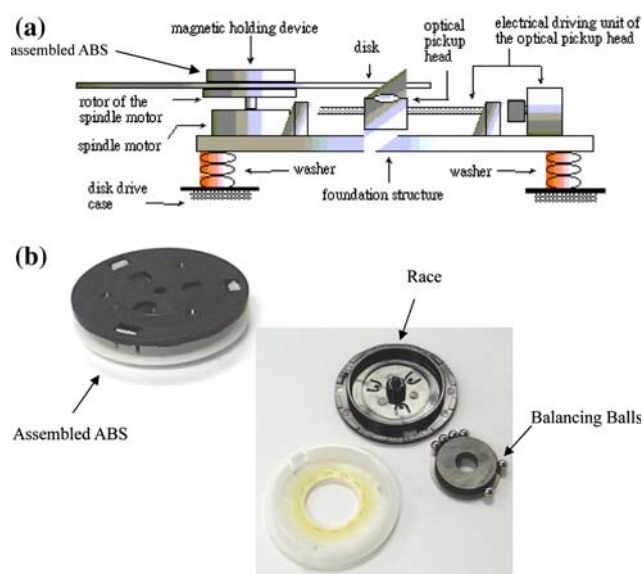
Schematic of the optical pickup assembly including rotating and non-rotating parts
